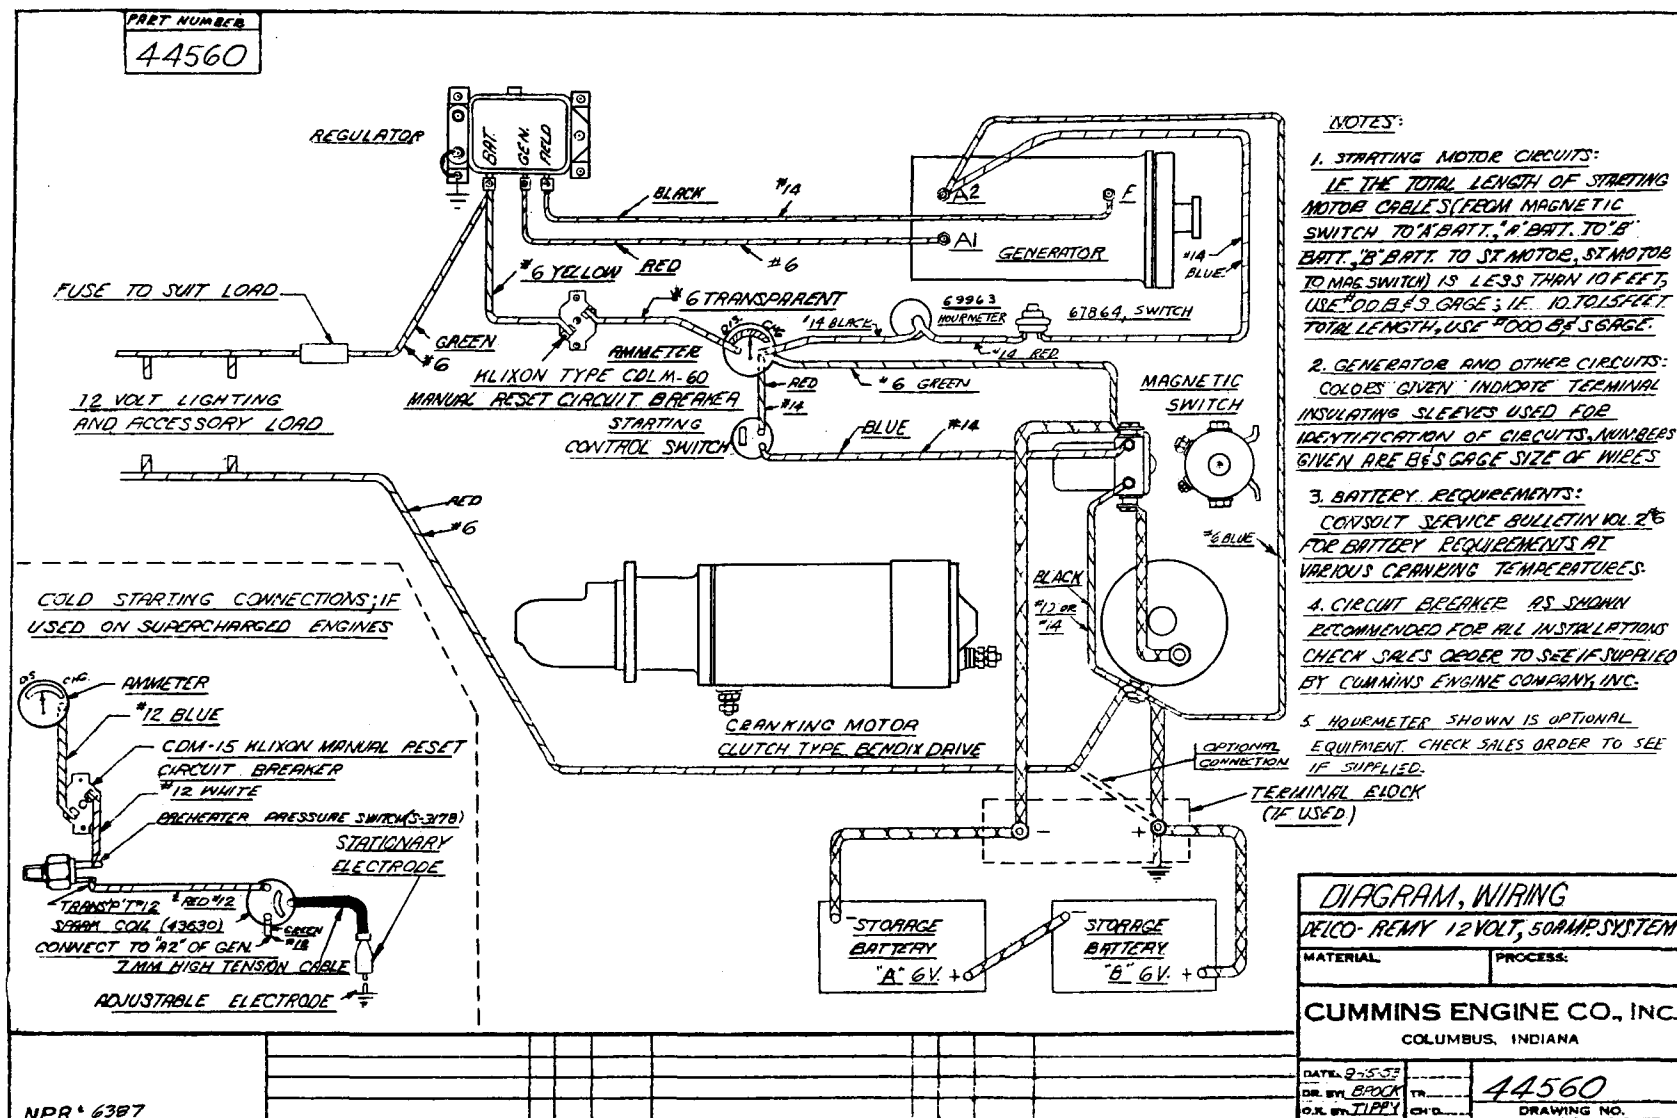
12 volt, 50 ampere Delco-Remy System with Small Regulator, Bendix Clutch, Starting Motor and Magnetic Switch
